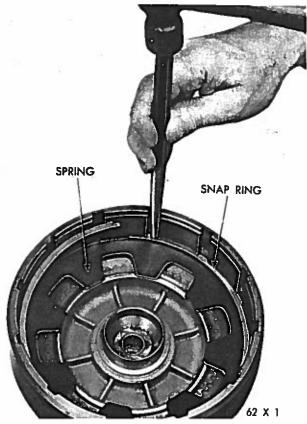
Installing Rear Clutch Spring and Snap Ring
